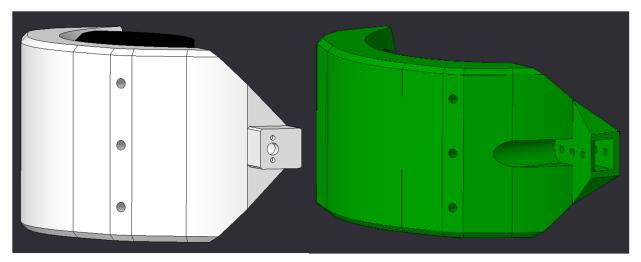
2F - 140 Gripper Attachment (Left), 2F - 85 Gripper Attachment (Right).
